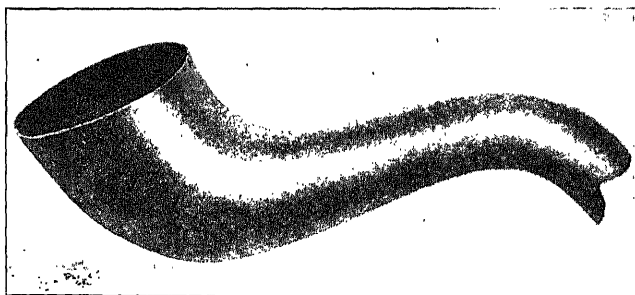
A Finish Welded Teapot Spout.
